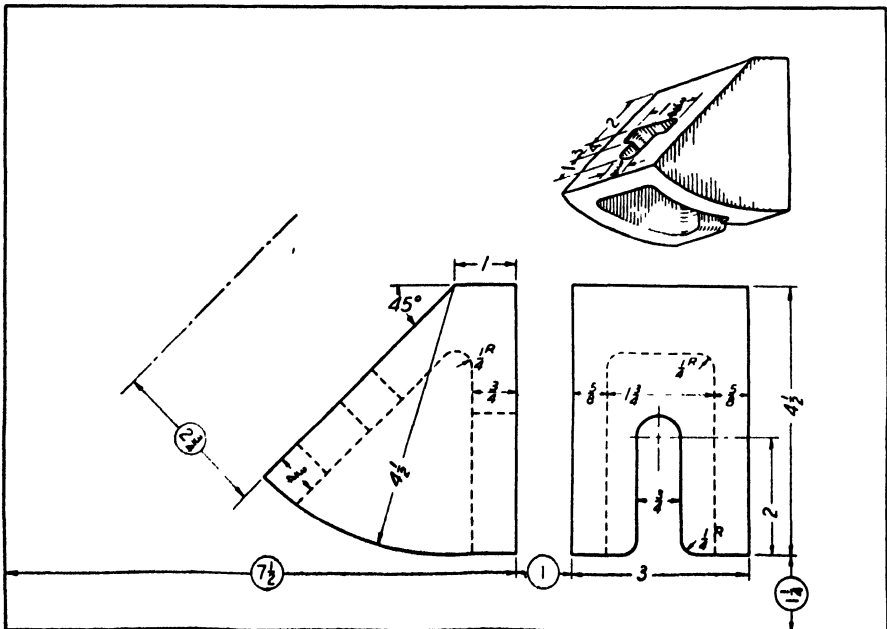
Prob. 166. Draw the two views given and an auxiliary view of the slanting face of the angle support.
